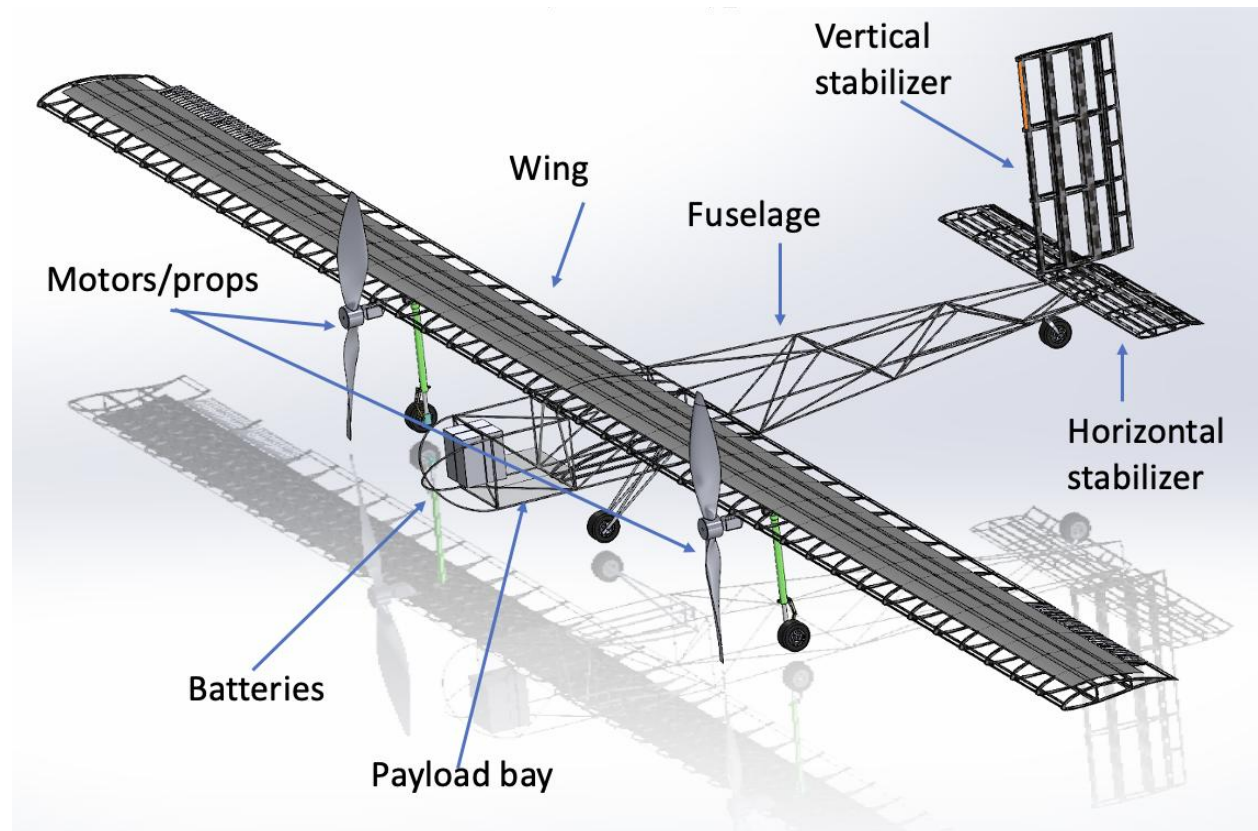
CAD assembly of the SPARC aircraft completed by the team
